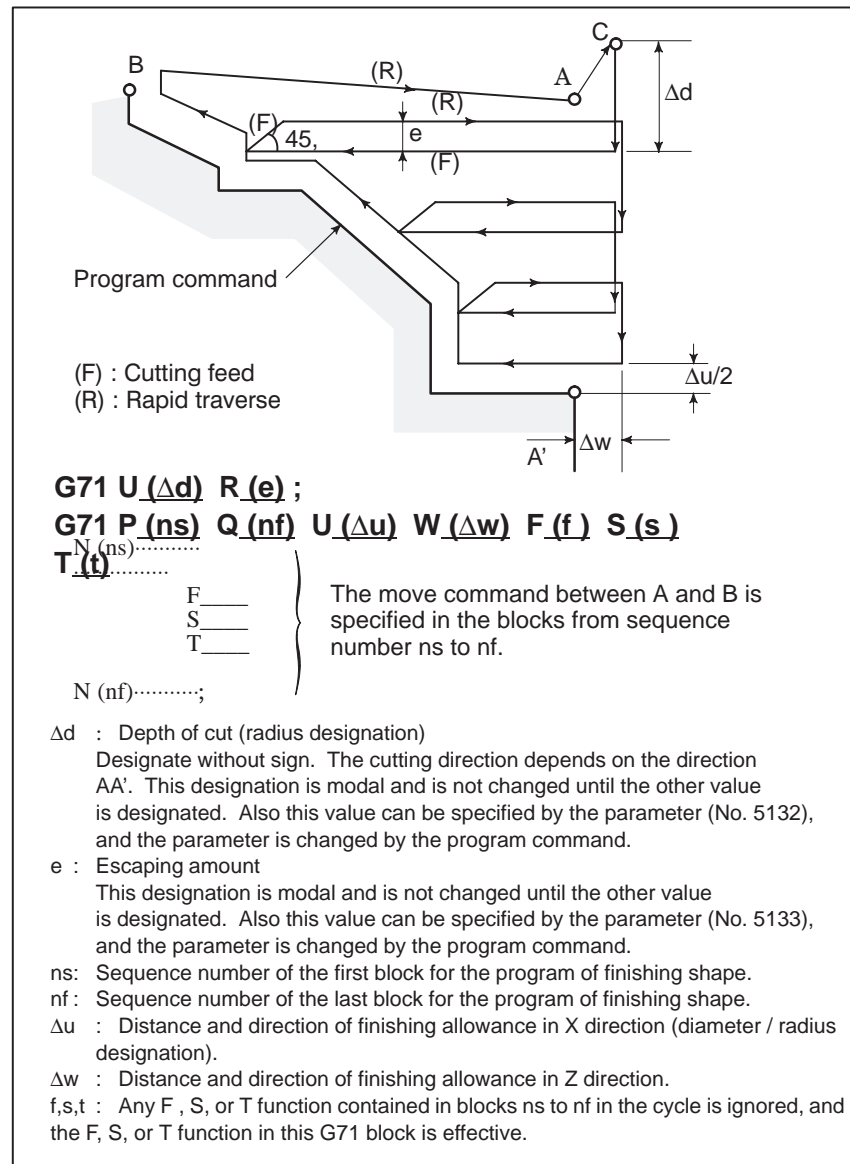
(a) Cutting Path in Stock Removal in Turning (Type I)
